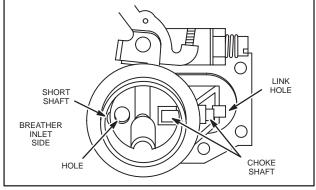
ASSEMBLING AUTOMATIC CHOKE
